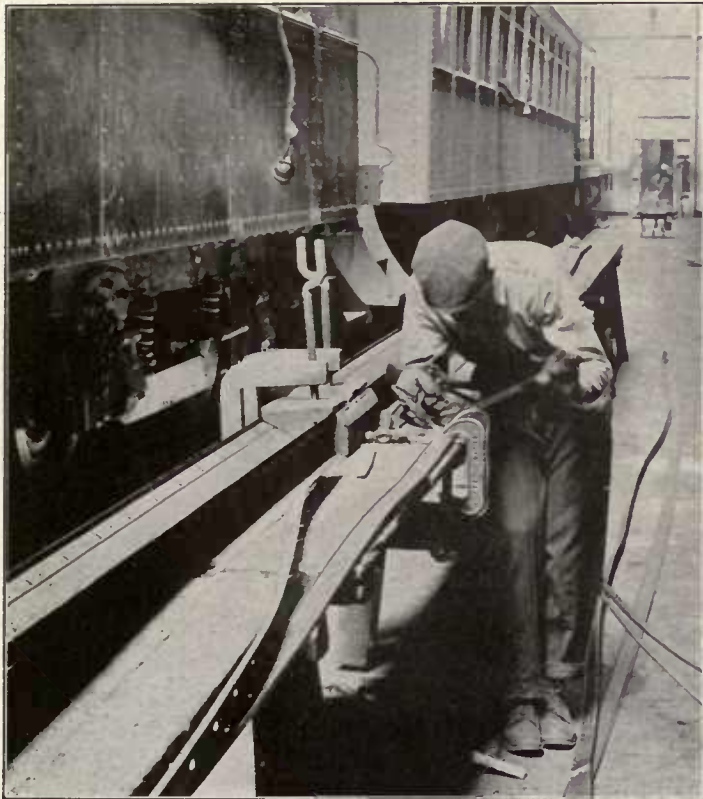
Welding Parts of Deck Molding Together; Eight Welds Per Car.
